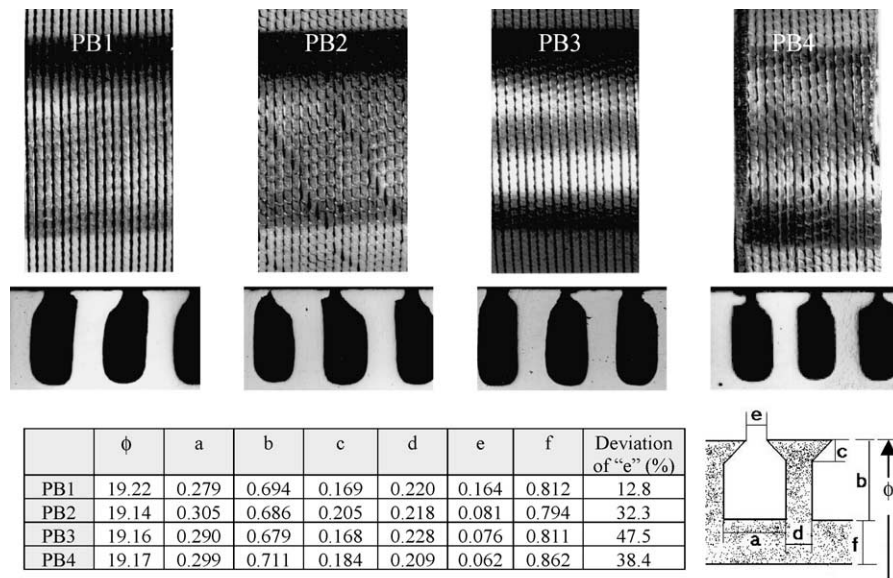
Enhanced surfaces and geometric data (upper photo: tube surface; lower photo: cut-view of subsurface channel).
